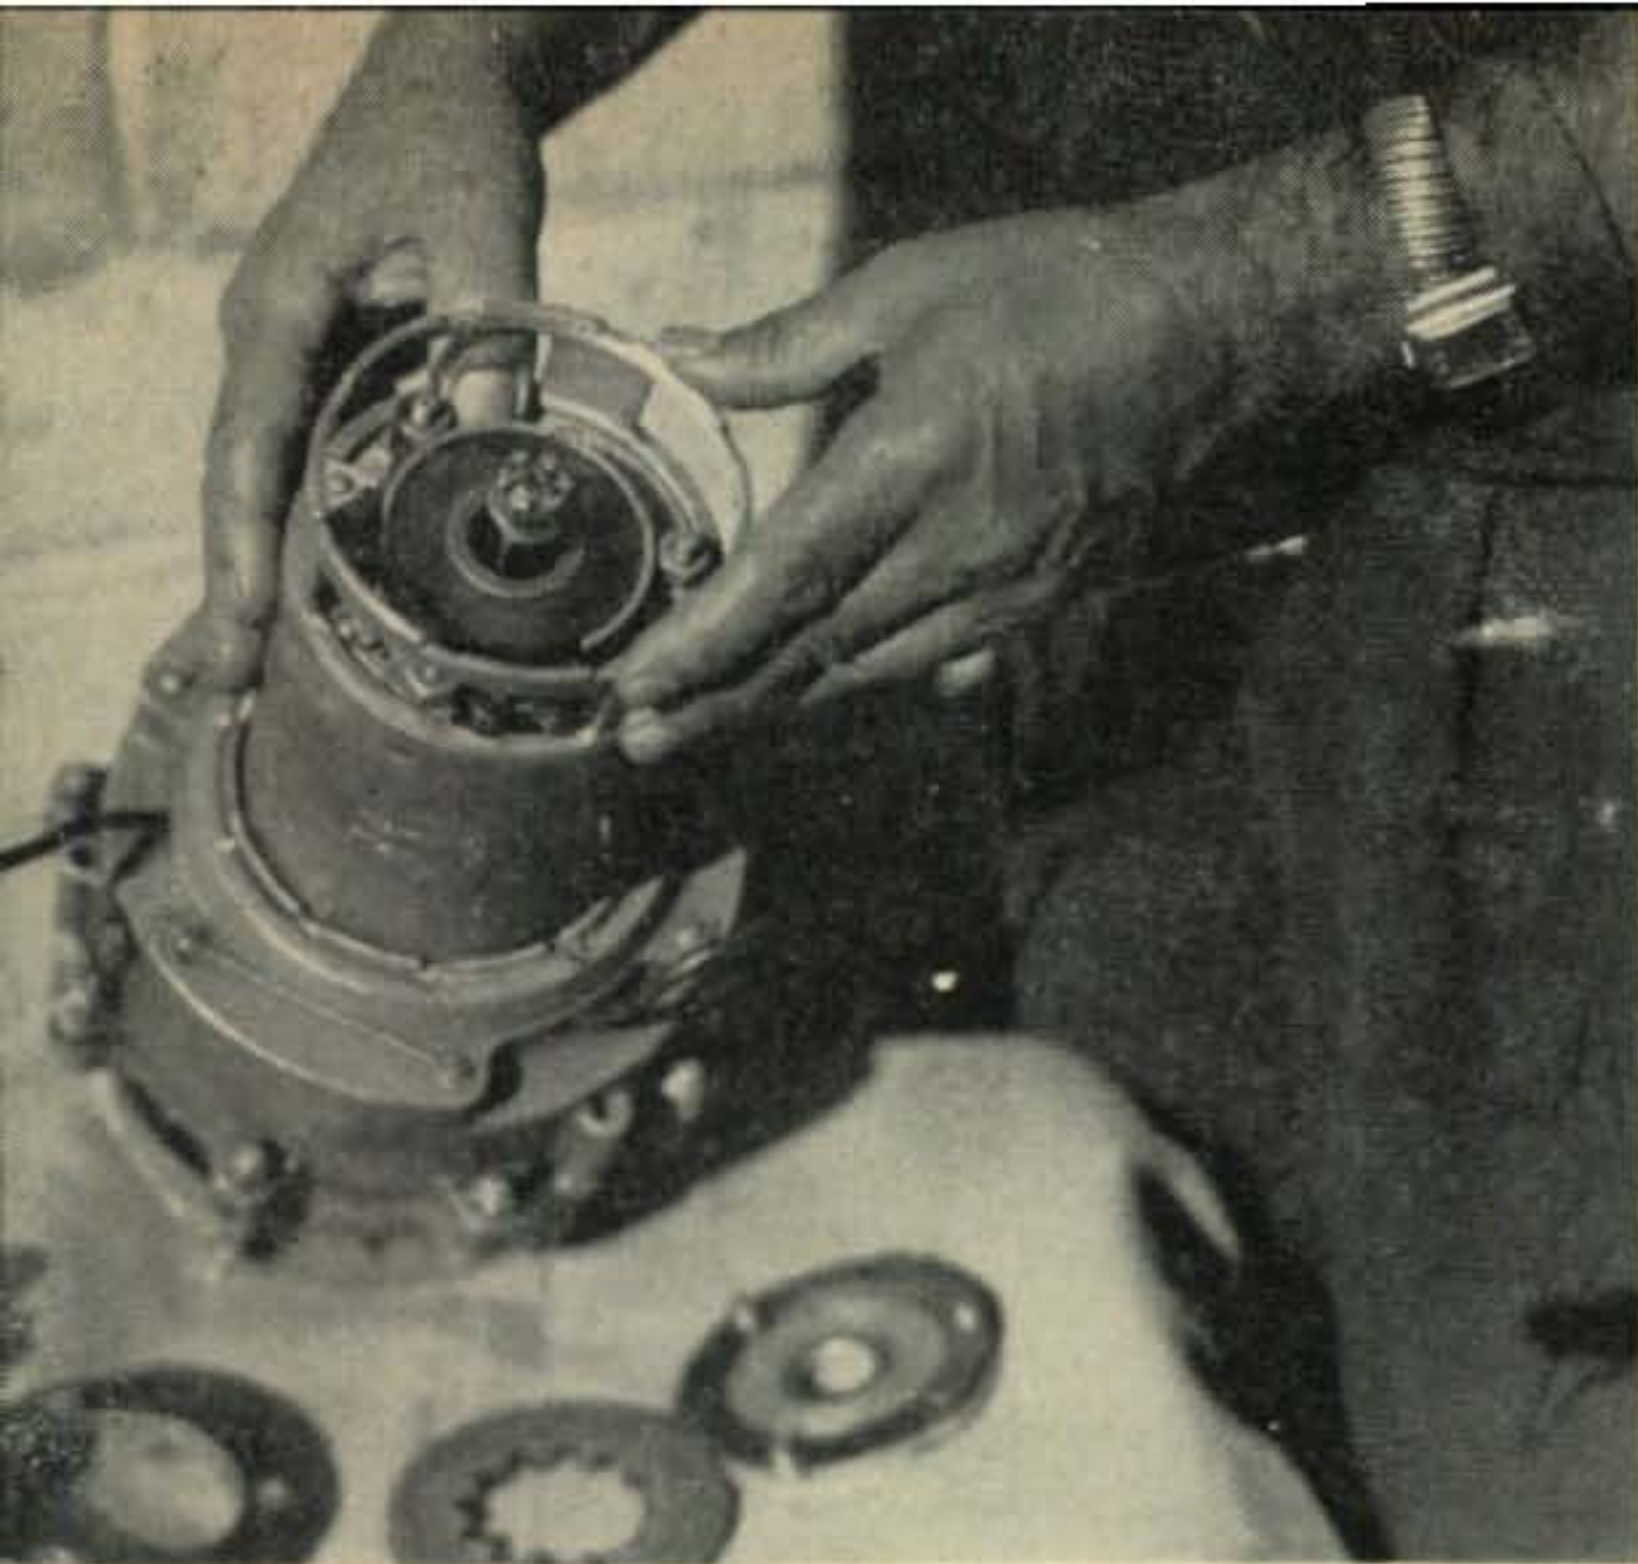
View showing what end bell should look like when magnetic brake is removed. Opening by left forefinger shows two connections to be shorted.
